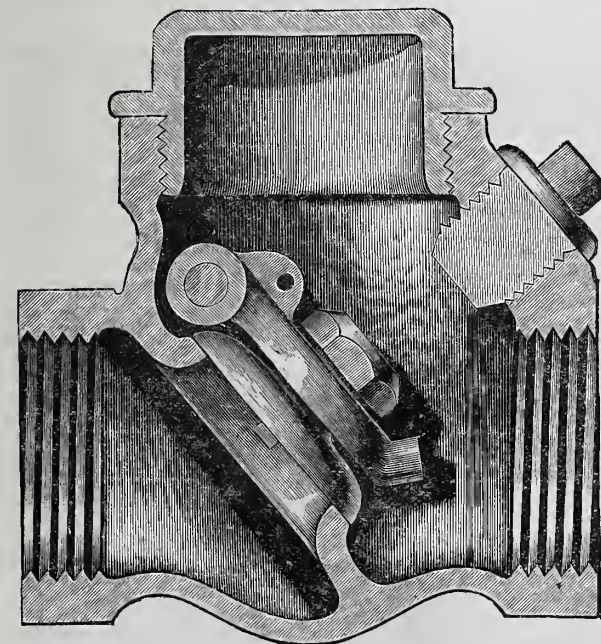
Sectional View of Pratt's Straightway Swinging Check Valve.
